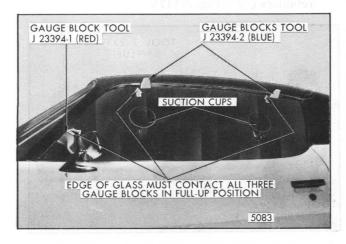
Door Window - Fore and Aft Alignment - "F" Styles
